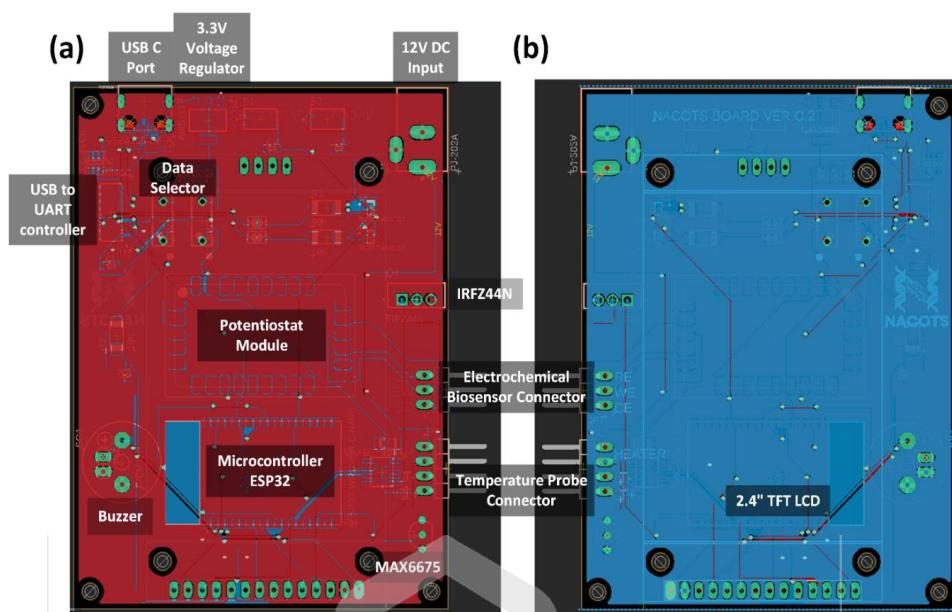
NACOTS PCB design (a) Bottom part of the board (b) Top part of the board
